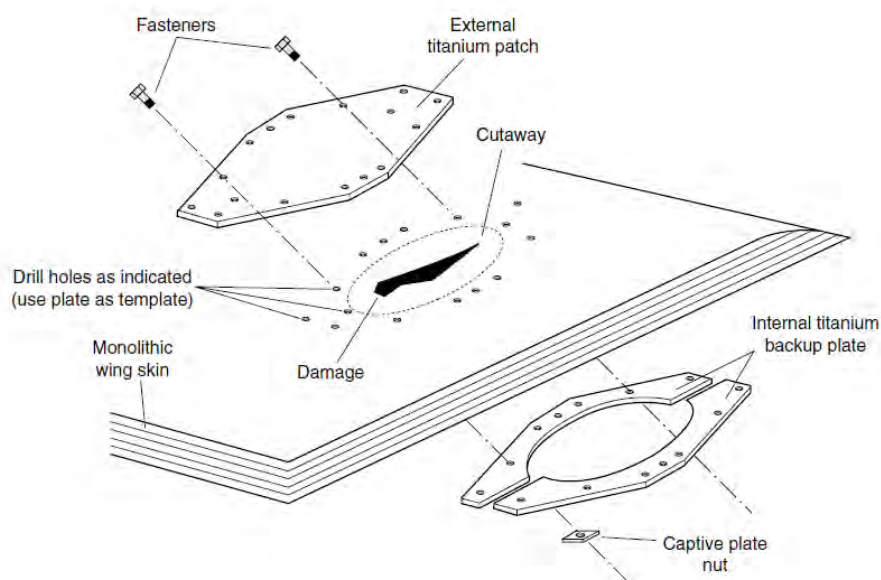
Bolted Doubler Patch Repair on a Thick Skin Composite [8].
